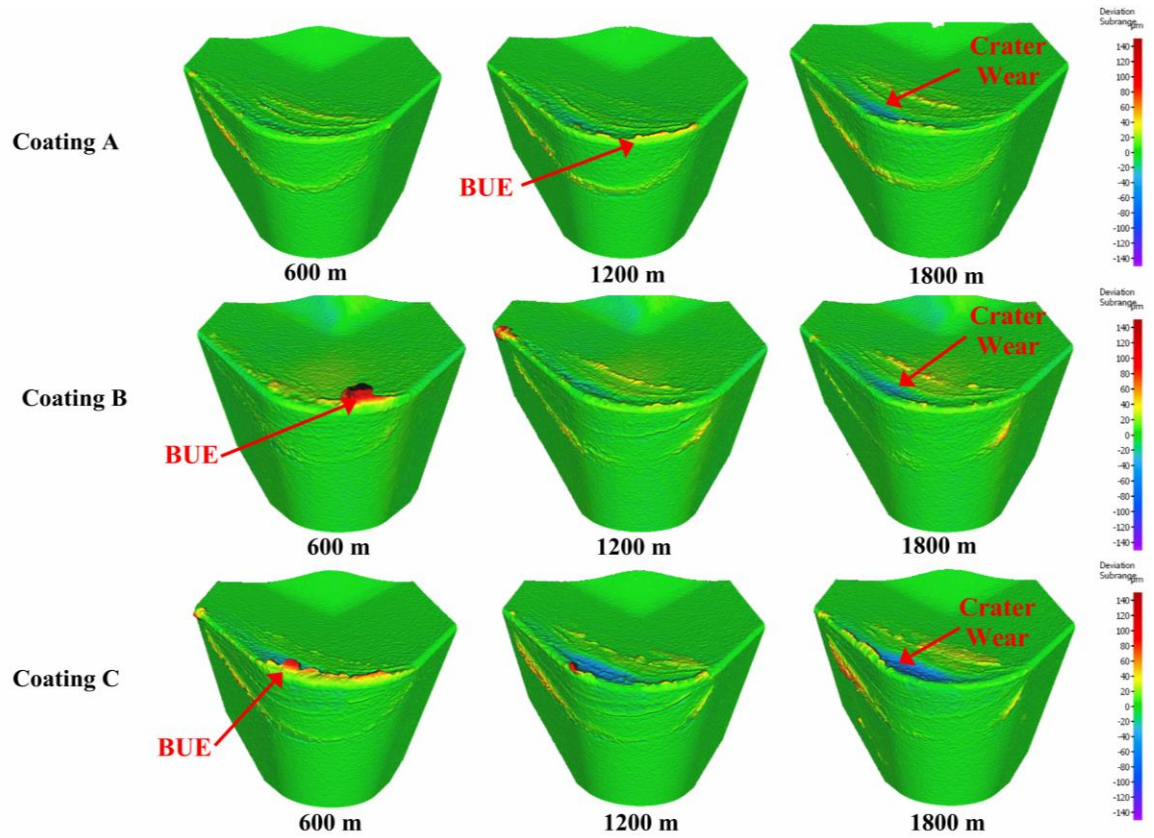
3D progressive wear difference measurement of the coated tools highlighting evolution of built-up layer and crater wear during machining.
